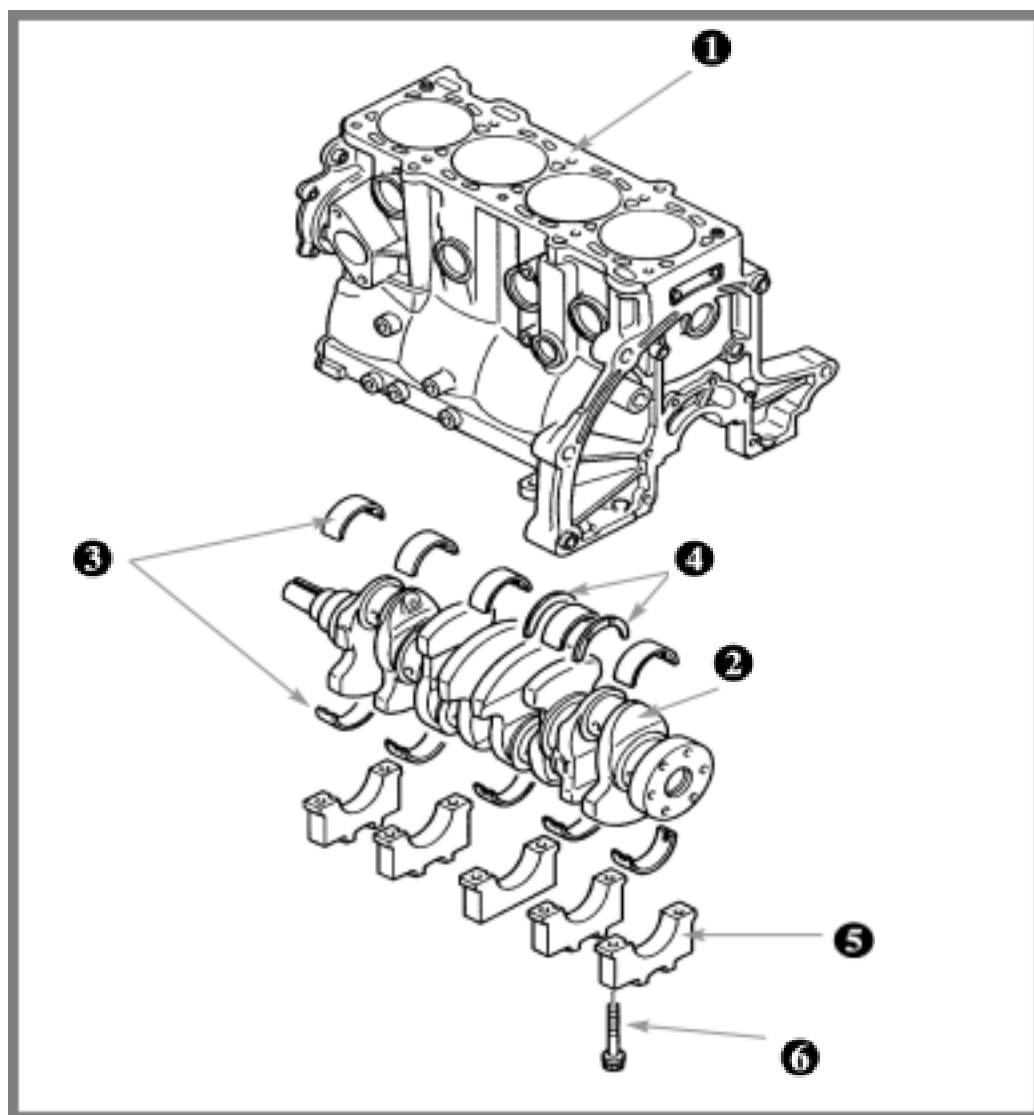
Main bearing caps are used to attach the crankshaft to the cylinder block.
